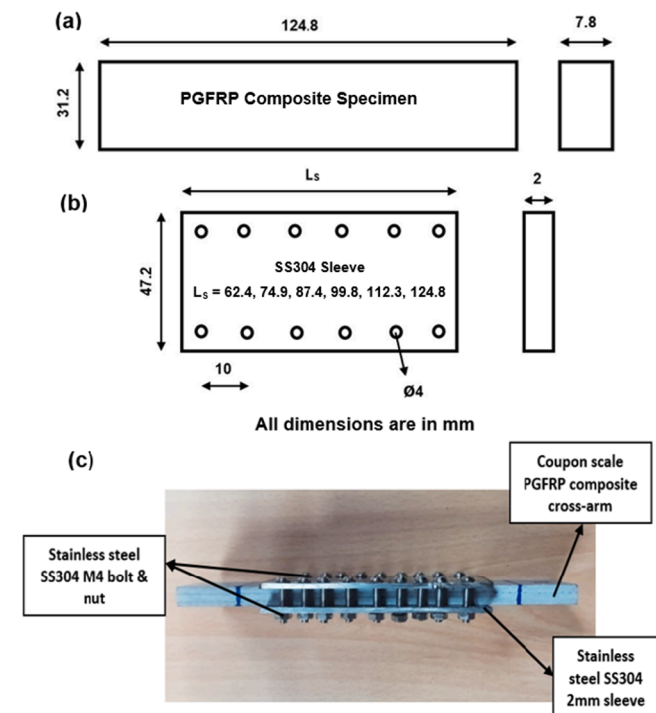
Coupon scale (a) PGFRP composite dimensions (b) SS304 sleeve dimensions (c) assembled test specimen.
